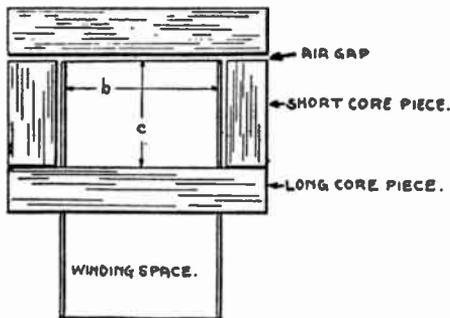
CORE ARRANGEMENT FOR FILTER CHOKE COILS
